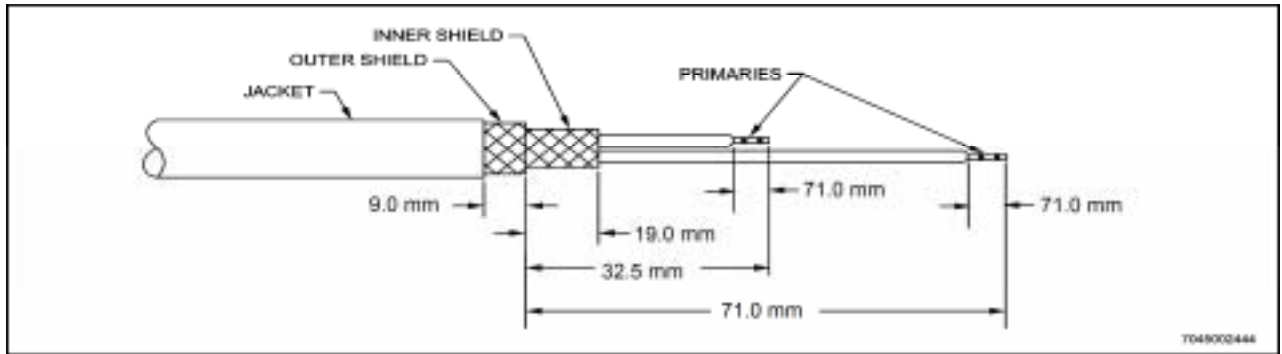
Double Shield Cable Strip Dimensions for Mini-Seal Crimp
